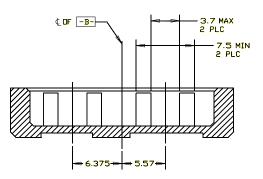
Slimline device plug connector interface dimensions (section G-G)
